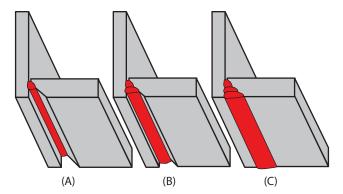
Practice 15-8 4G weld sequence.
